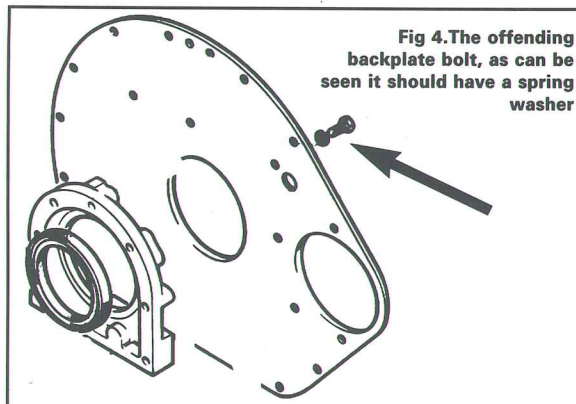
The offending backplate bolt, as can be seen it should have a spring washer
